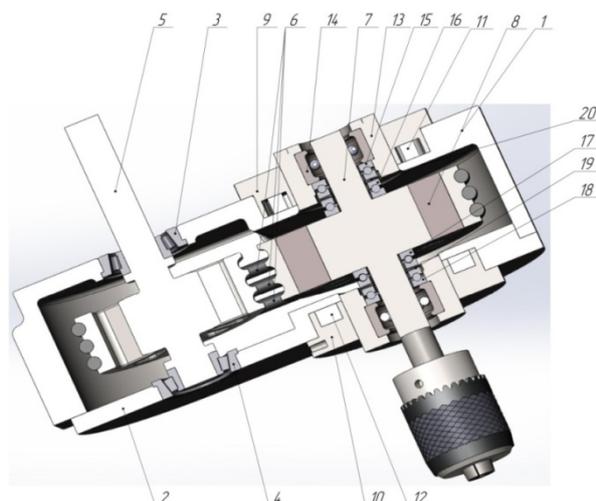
Device for vibrational drilling 1 – body 2 – housing cover; 3,4 – bearings; 5 - input shaft; 6 - flexible coupling; 7 - output shaft; 8 – magnets; 9, 10 – magnetic bodies; 11,12 – magnets; 13 – screw; 14 – bearing; 15,16,17,18 - axial bearings; 19,20 - springs
